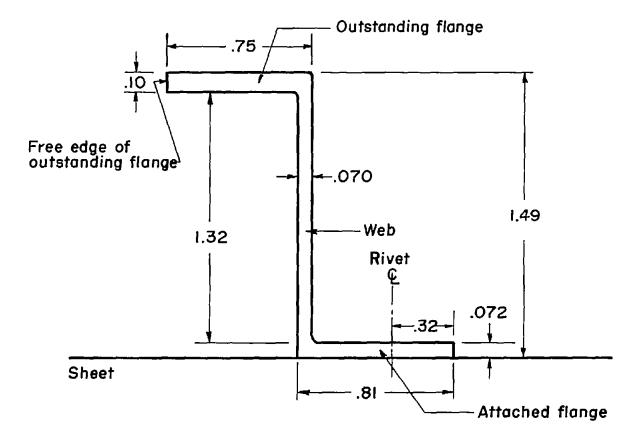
Average cross-sectional dimensions of stringers of riveted panels Rf-4, Rf-5, Rf-6, Rp-10, Rp-11, Rp-12, Rb-16, Rb-17, and Rb-18. All dimensions are in inches.
